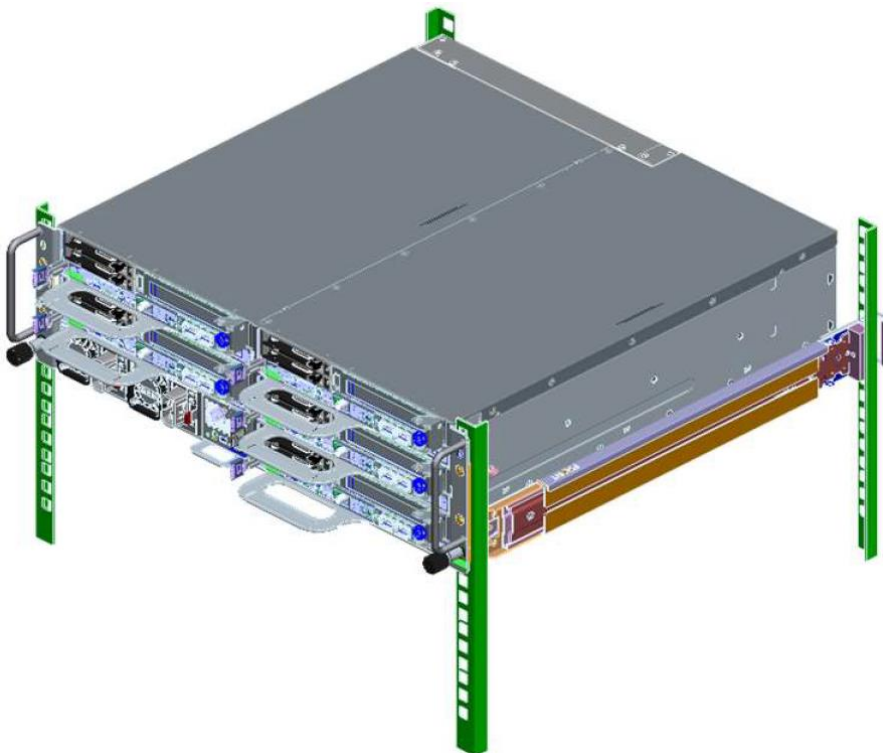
Open edge chassis installed in 19" rack frame using an adjustable shelf
